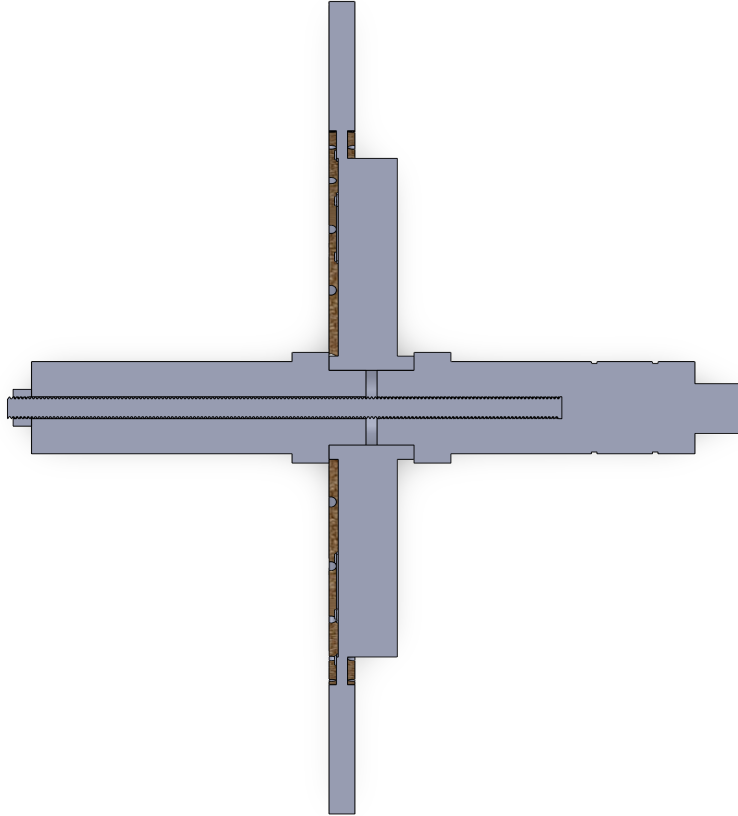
Section view of the friction plate shaft assembly. The threaded rod and nut which clamps the two shafts together can be seen in this view
